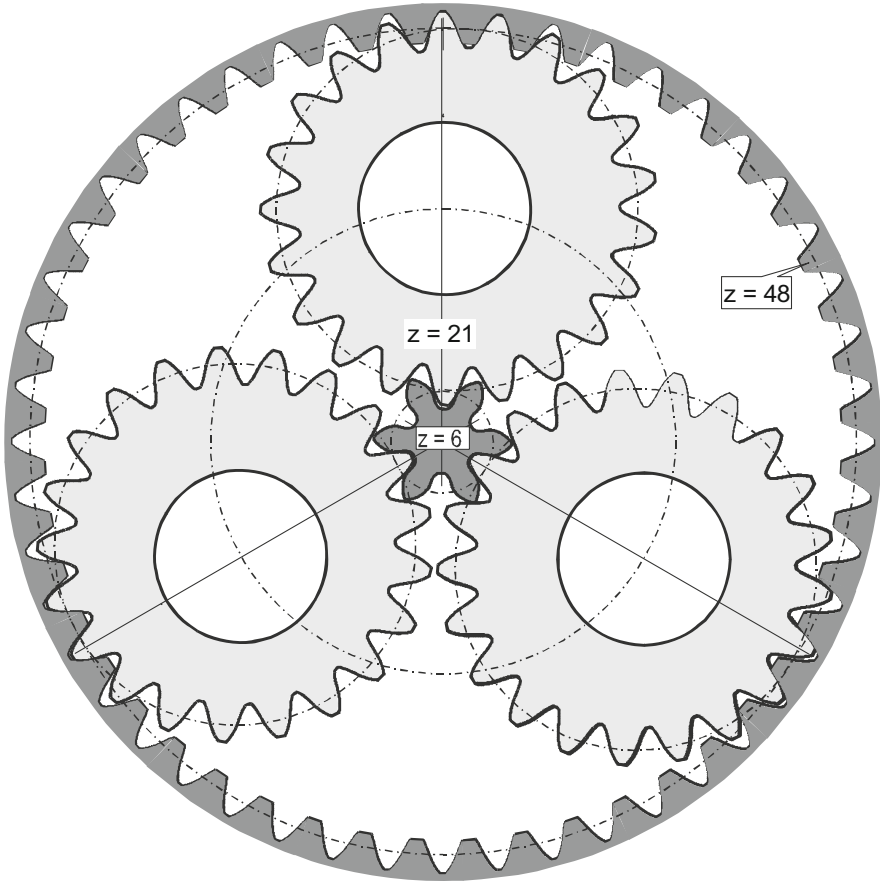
A planetary (spur) gear train (sun gear $z = 6$, planet gear $z = 21$, ring gear $z = 48$)
